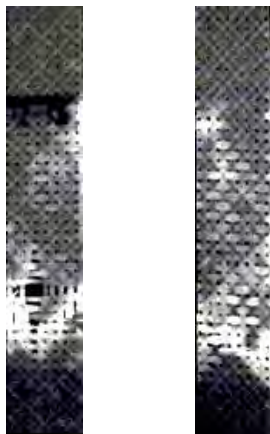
Front and rear side of a sample with delamination and gapping defect after mechanical testing
